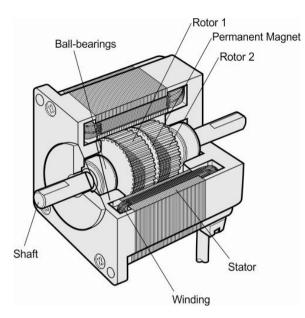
Motor structure diagram: cross –section parallel to shaft (4 – phase standard – 1.8° per step – hybrid stepping motor)
